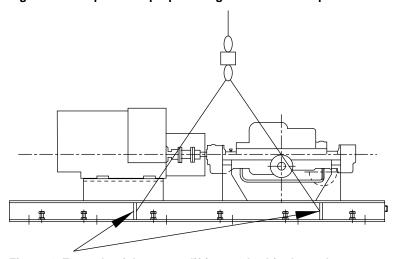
Example of the proper lifting method for baseplate-mounted units with a driver
